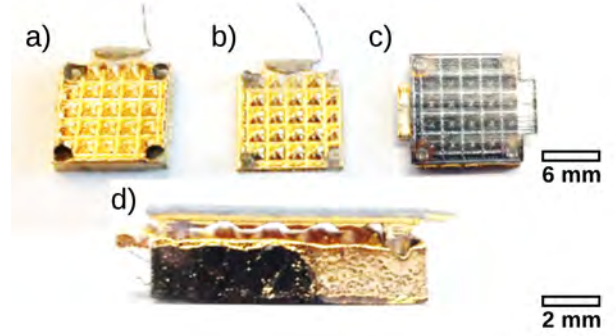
Implemented 3D printed capacitive sensor a) fabricated bottom plate, b) fabricated top plate, c) assembly of the fabricated bottom and top plates, d) profile view of the assembled sensor.
